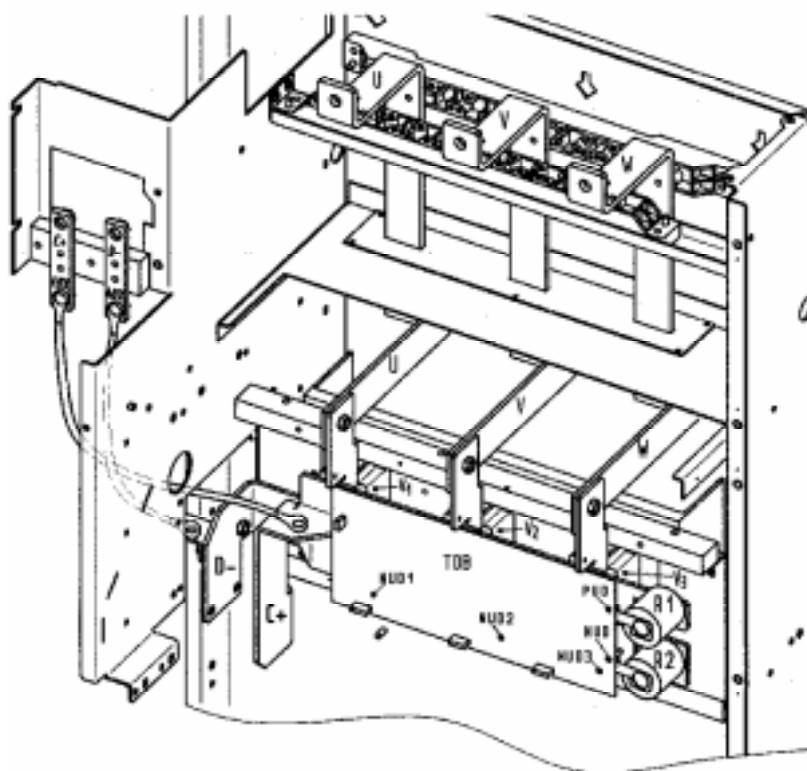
TDB board, pre-charging resistors and thyristor modules V1, V2, V3
